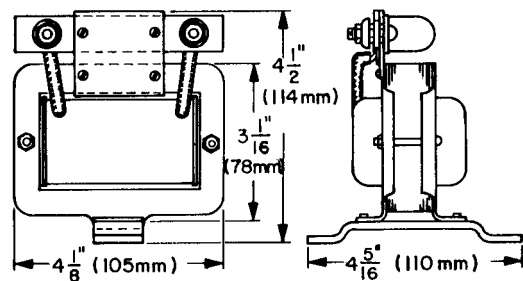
Dimensions of tripping reactor Model No. 12XBC11A
